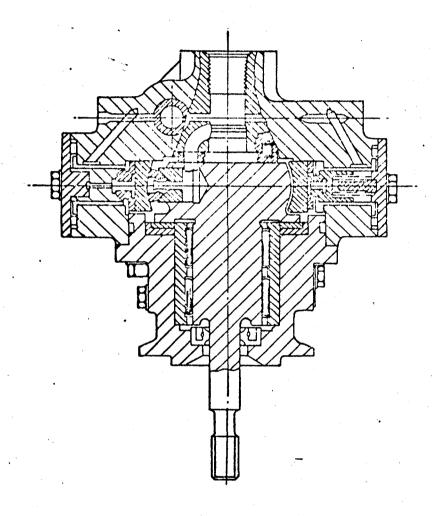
Radial Piston Pump - External Eccentric Fluid Film Bearings
